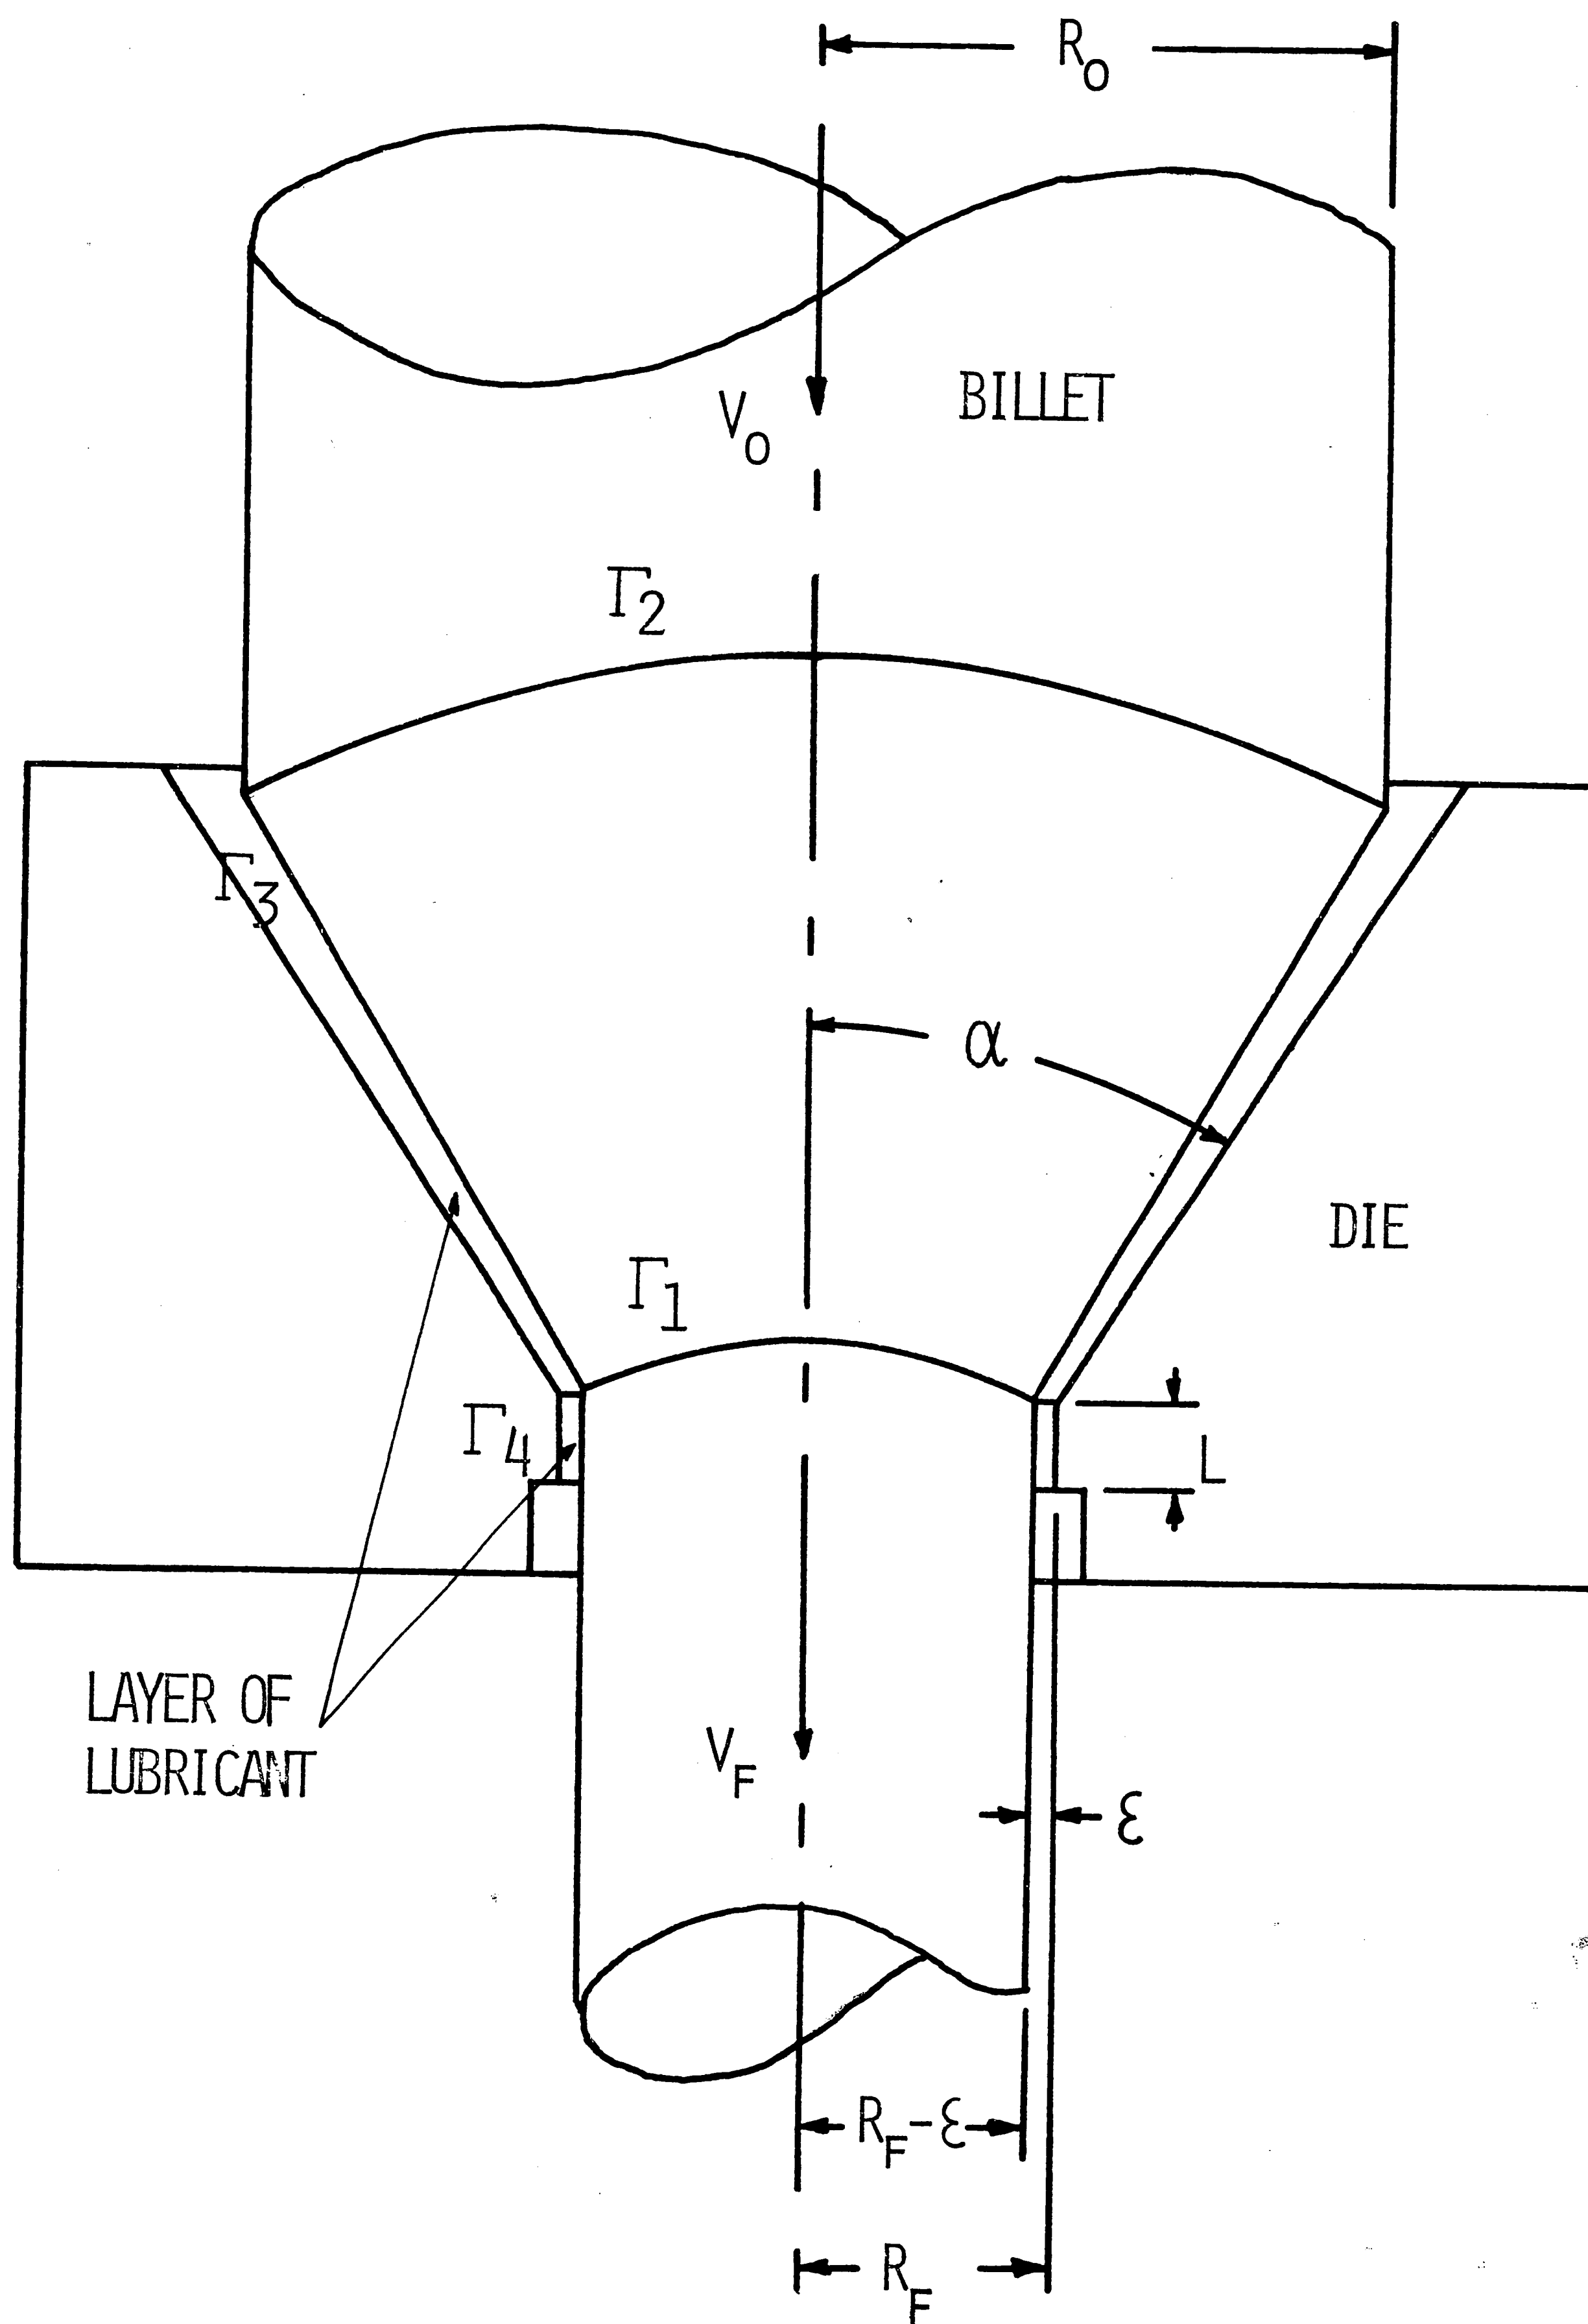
DIE AND EXTRUSION GEOMETRY
